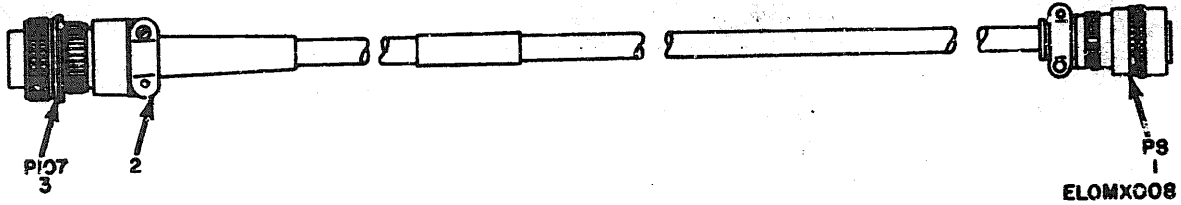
Cable Assembly, Special Purpose, Electrical, CX-7567/ASM-63 998941-01-01 (W5)
